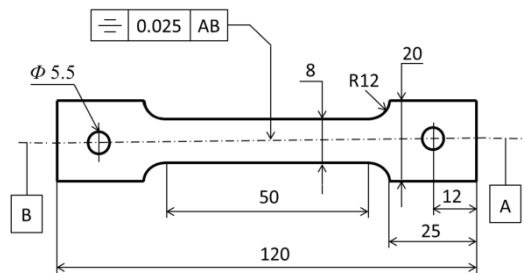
Dimensions of the sheet specimens with thickness of 1 mm (in millimeters).
